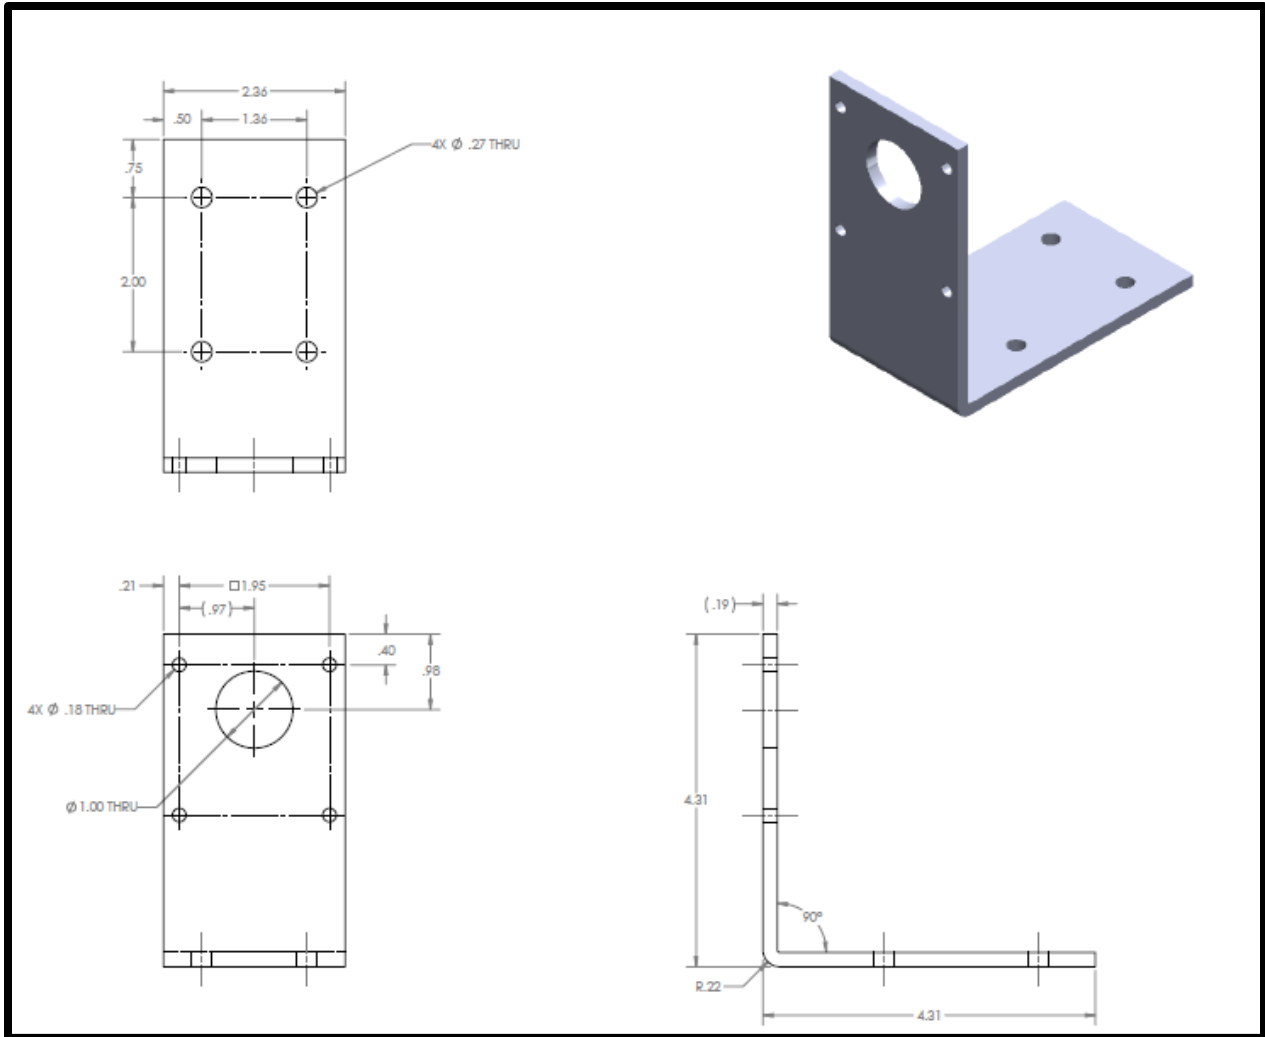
SolidWorks Part Drawing-Motor Mount Bracket
